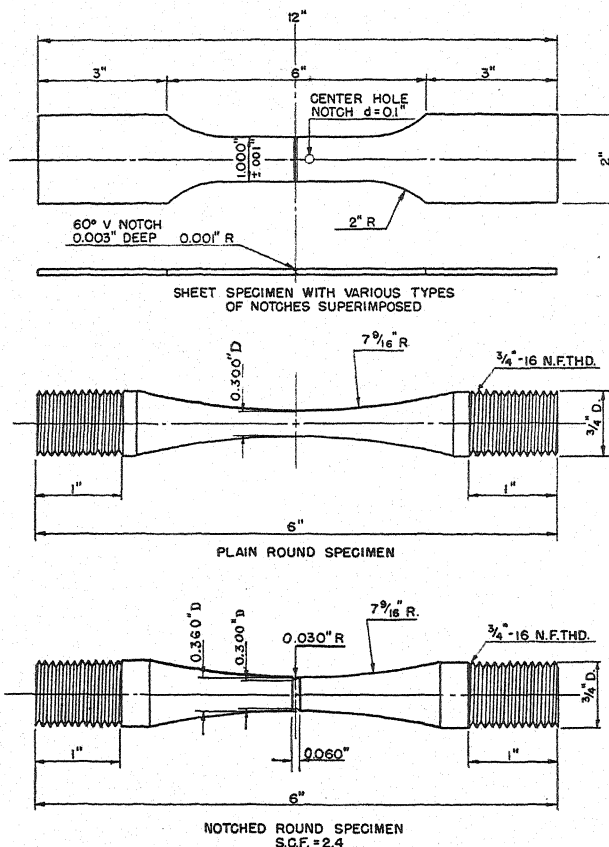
Dimensions of the Specimens Used for Axial Loading Fatigue Tests.
